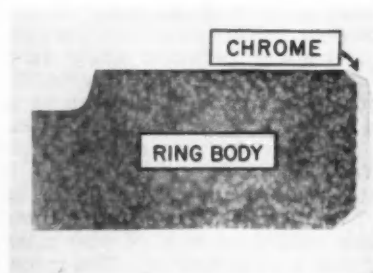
The face of this chrome-plate compression ring has a thread finish.
